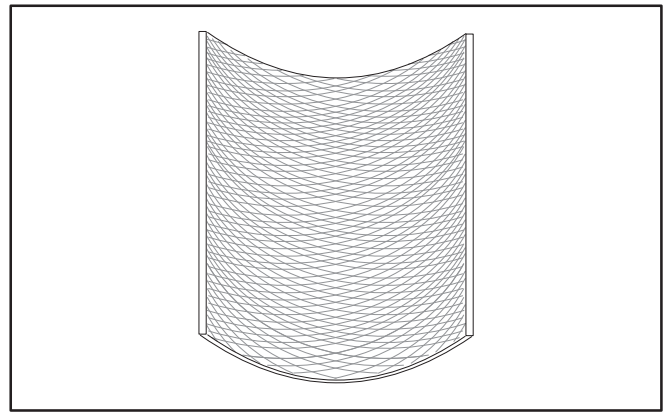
PROPER HONE CROSSHATCH IN BORE
